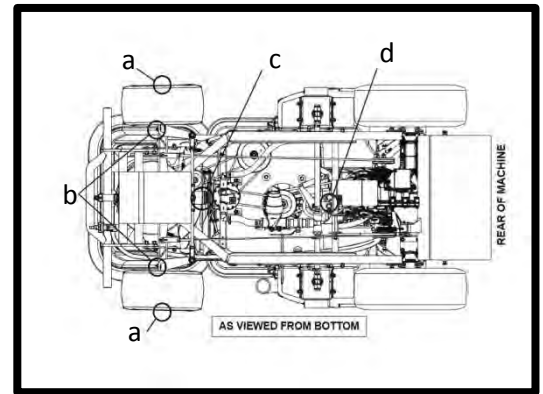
a)2 Front Wheel Bearings, b) 2 Front Wheel Spindles, c) 1 Front Axle, d)Idler Arm, e)Steering Arm
